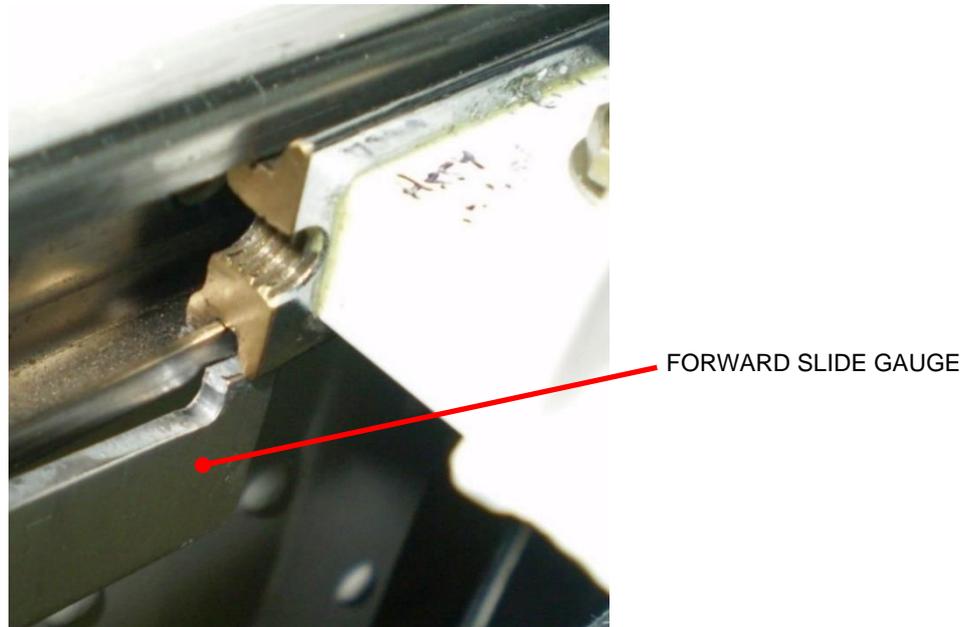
Checking with the Forward Slide Gauge. Note that all four corners require checking.
